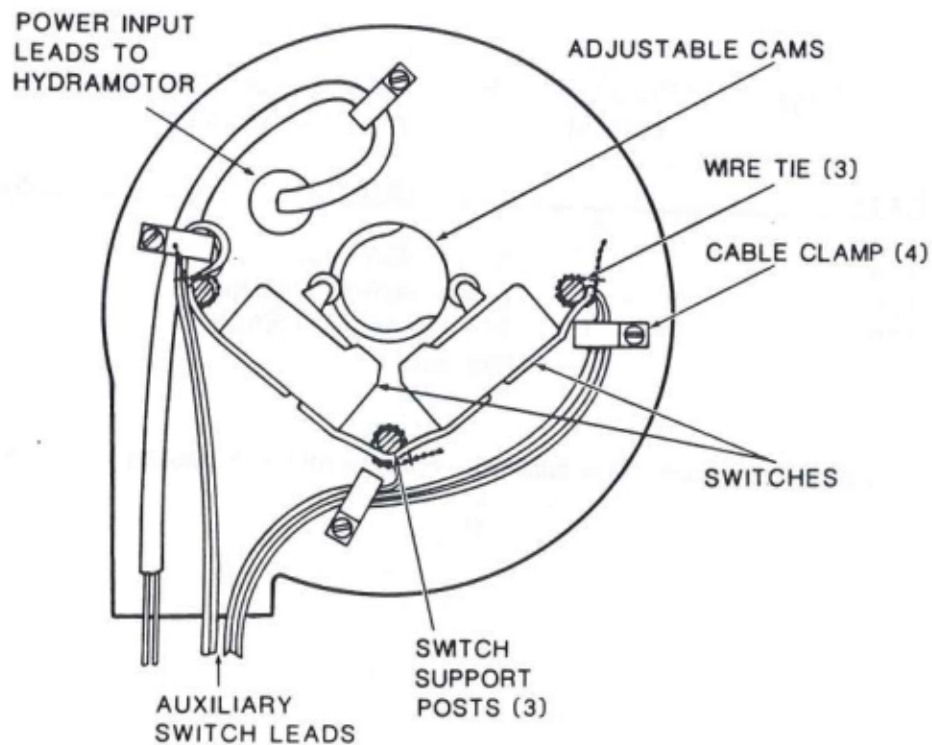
Auxiliary Switch Box Assembly Wiring
